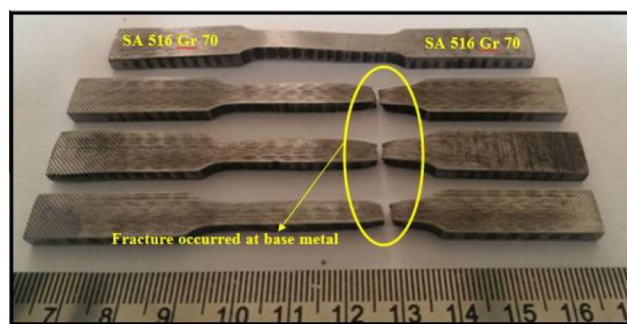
ASTM E8 standard tensile of laser welded samples with base metal.
